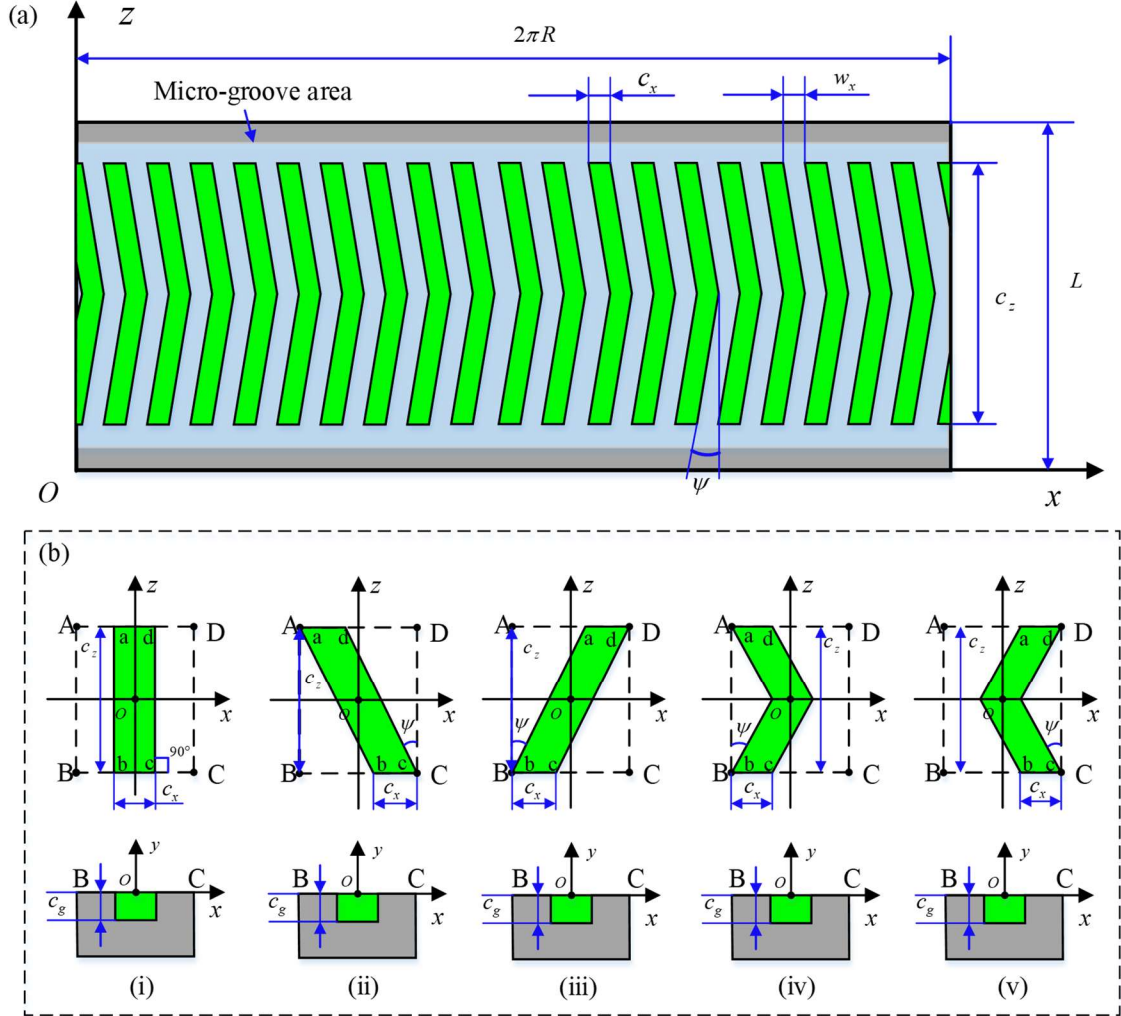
The schematic diagram of the expanded surface of micro-grooved bearing with different geometric shapes: (a) the expanded surface of micro-grooved bearing; (b) micro-grooves with different geometric shapes i.e., straight-groove, left spiral-groove, right spiral-groove, left herringbone-groove, right herringbone-groove.
